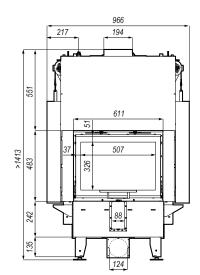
Projections with dimensions of the DEFRO HOME RIVA SM BP and DEFRO HOME RIVA SM BL (mirror reflection) fireplace inserts.
